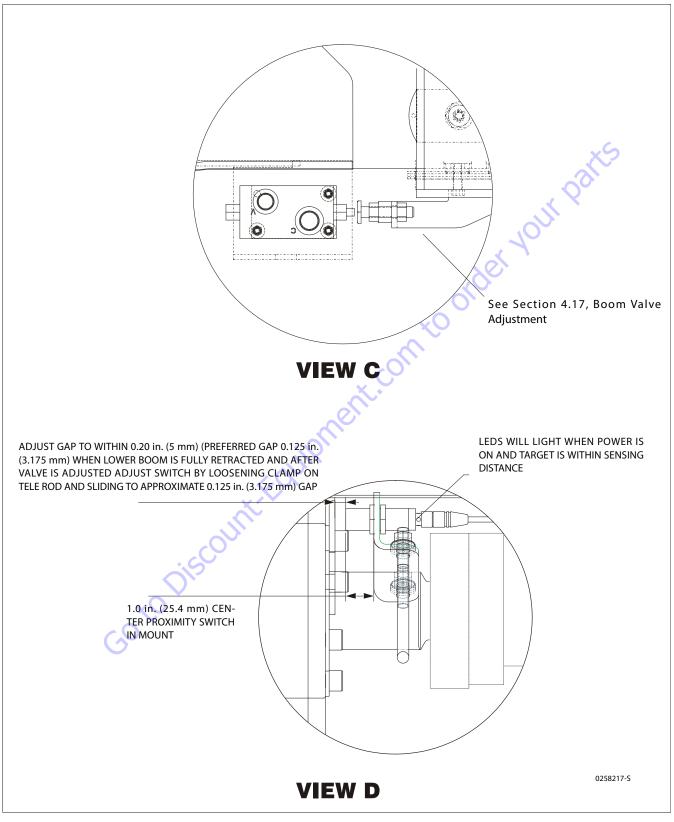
Boom Valve and Limit Switches Location (Sheet 2 of 3)
